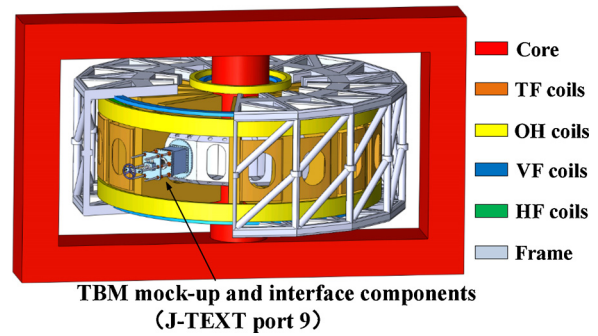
View of TBM mock-up integration in J-TEXT Port 9.
